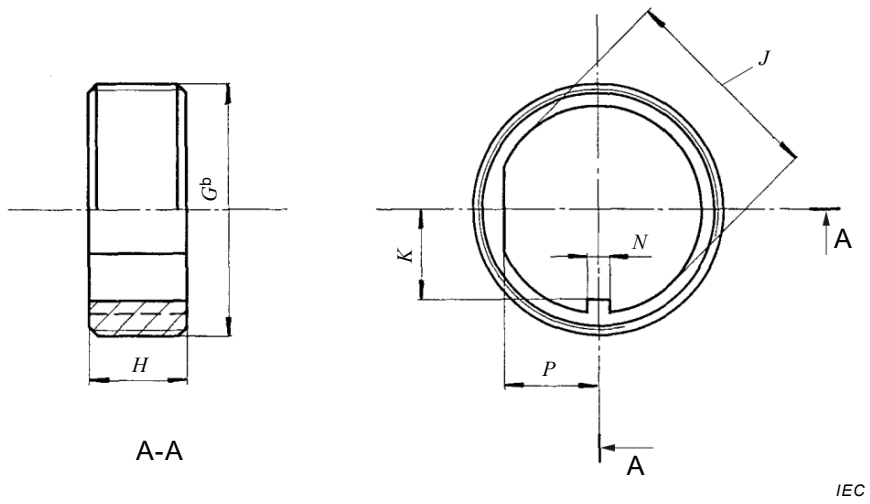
Flange type C: 60154 IEC-PCR 220-500
